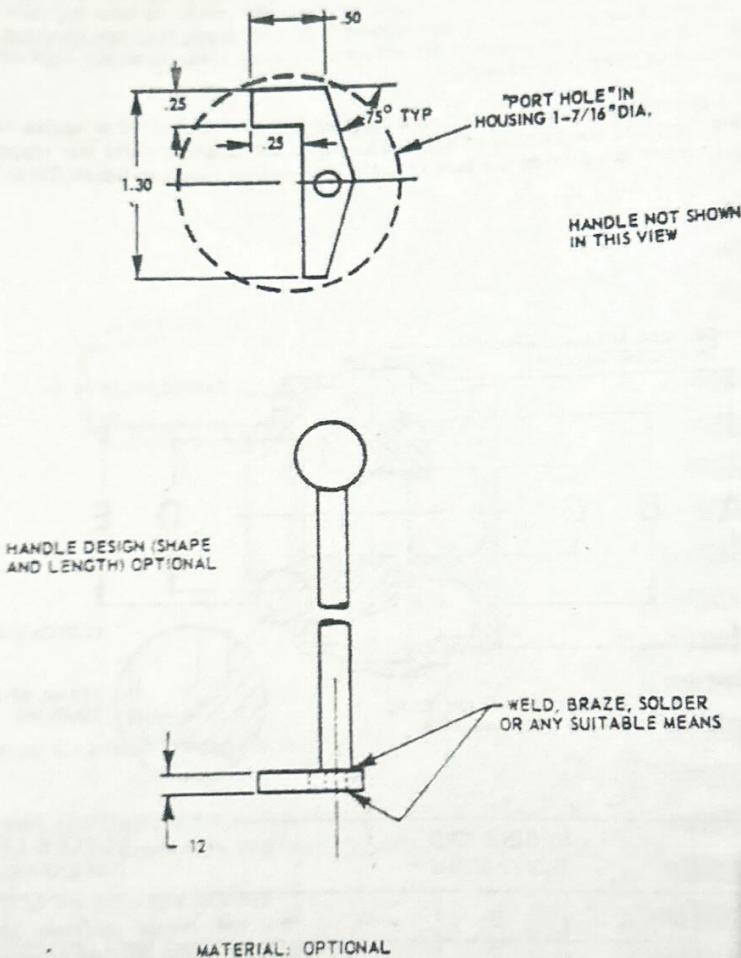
Dimensions for Making Permanent Set Gage
